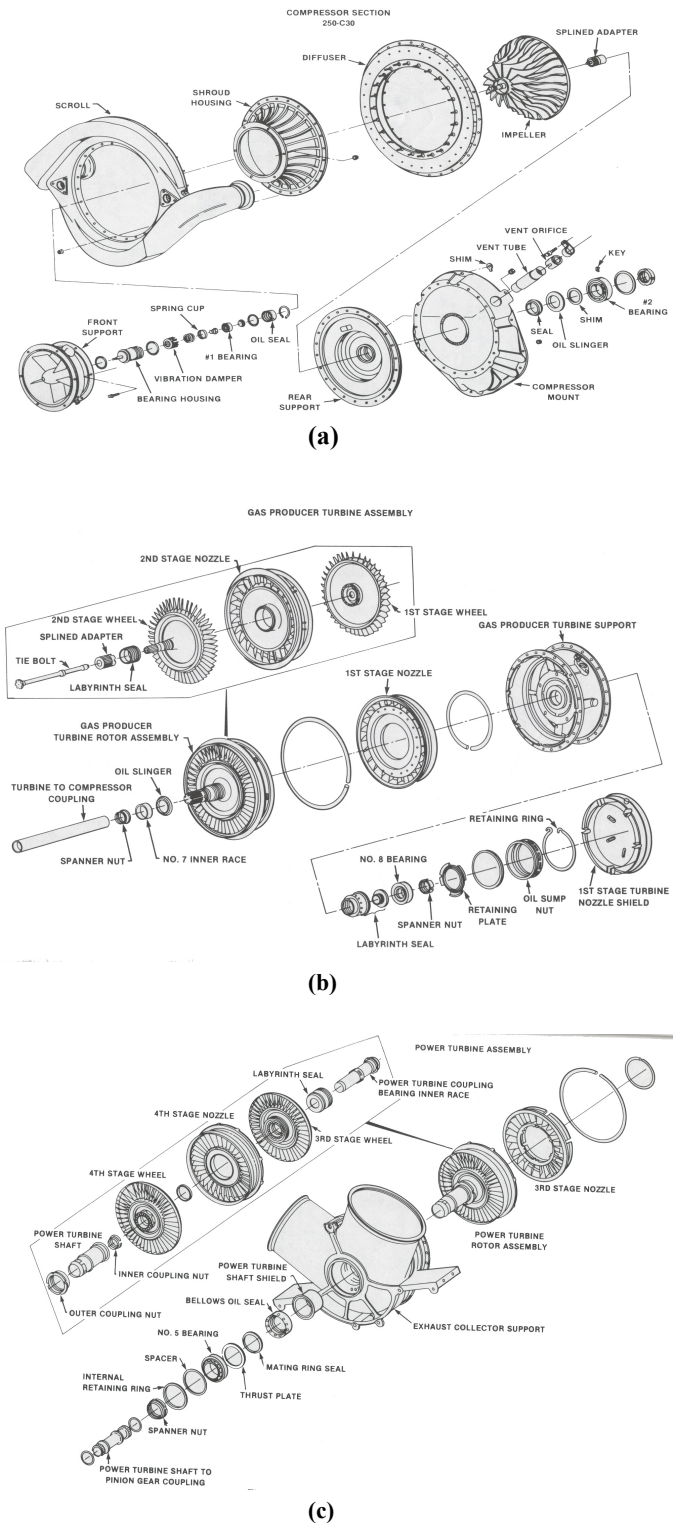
(a) compressor assembly, (b) gas producer assembly, and (c) power turbine assembly of the Allison 250 engine
